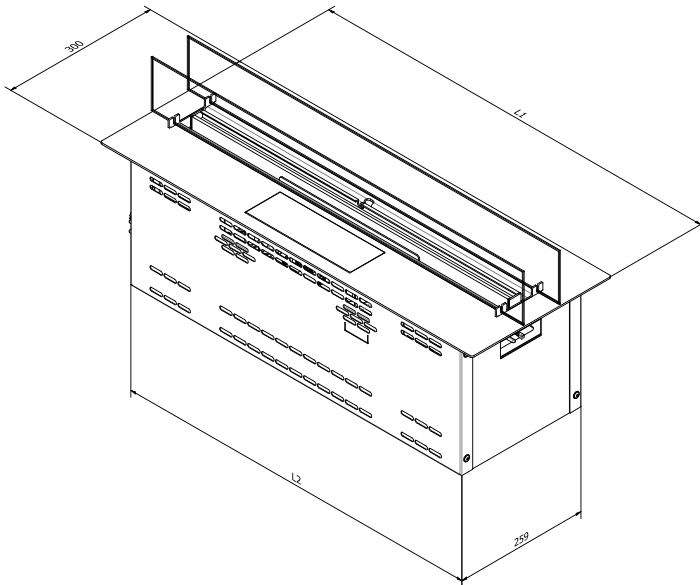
Overall dimensions shown on the double-glazed version of the device
